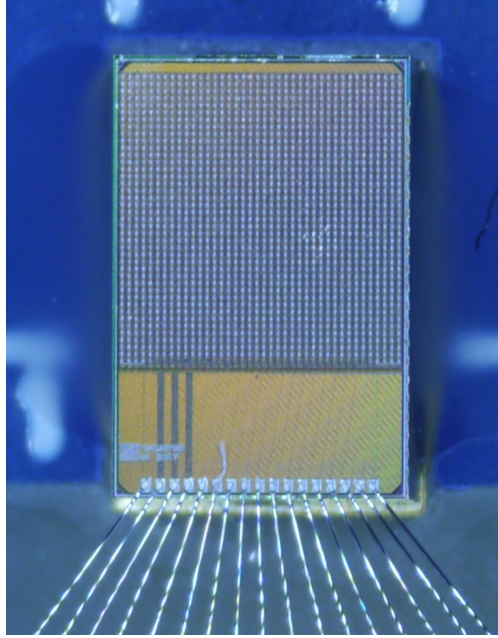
Bare PixCap65 chip assembly. Wire bonds are connecting the IO pads to the test PCB.
